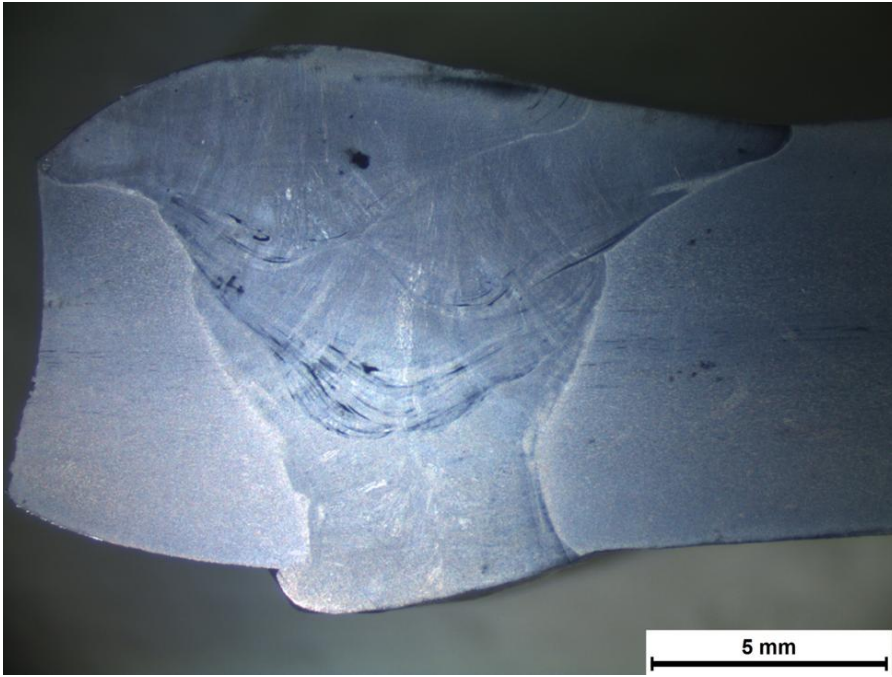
Macroscopic examination of fractured 316Ti uncorroded material
